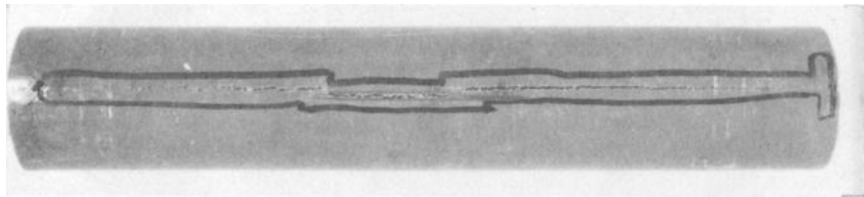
Specimen X-3 HAZ, tested at -1°C , showing cleavage fracture. The crack started in the HAZ notch and jumped into the weld after using about $\frac{2}{3}$ of the notch length; some transverse cracking at one end of specimen.
